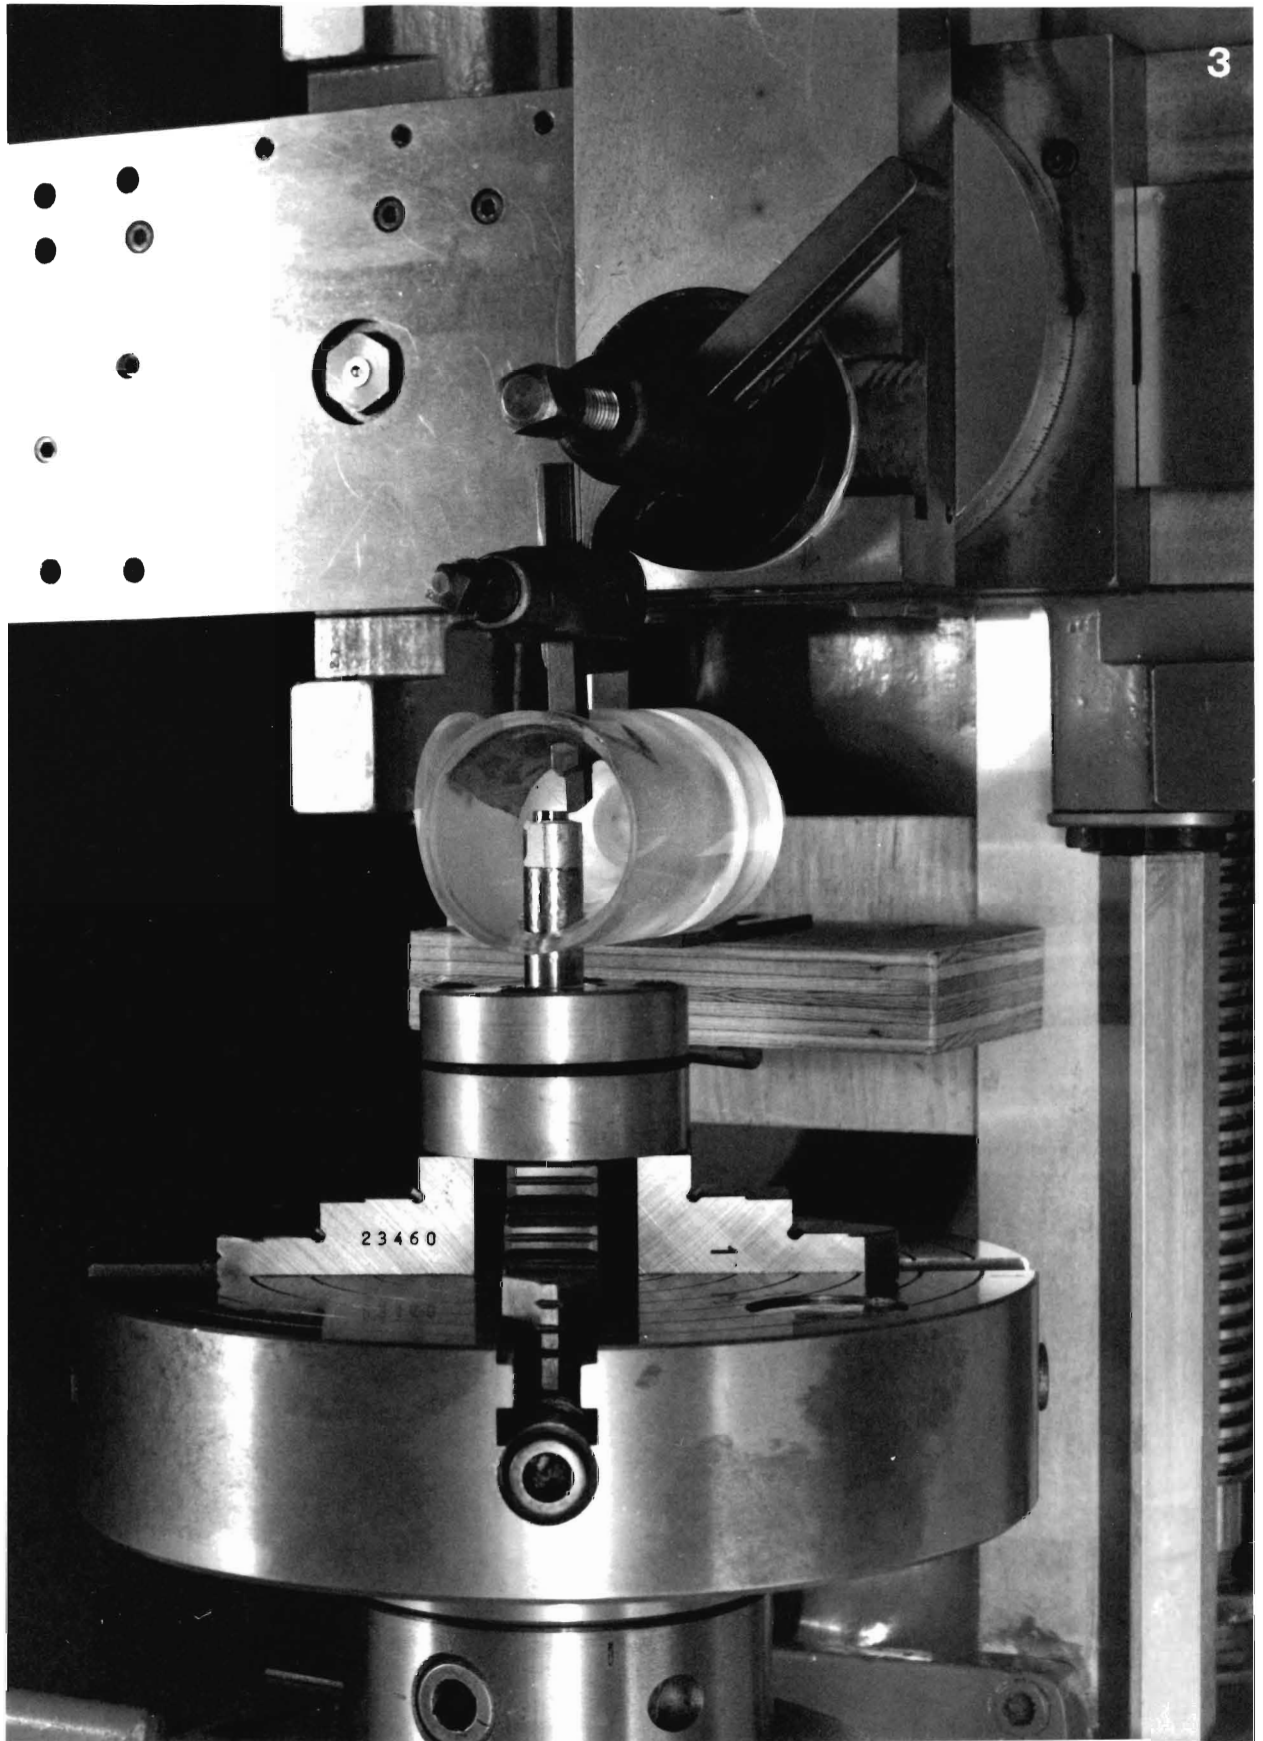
COLLECTING FUNNEL SURROUNDING THE SPECIMEN
